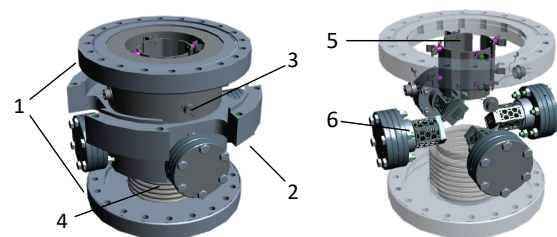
Vacuum chambers of the middle section: left – outer view, right – inner view. 1 – flanges for electrostatic tubes connection, 2 – mechanical support, 3 – BPM's feedthrough, 4 – bellow, 5 – BPM's electrodes, 6 – NEGs.
